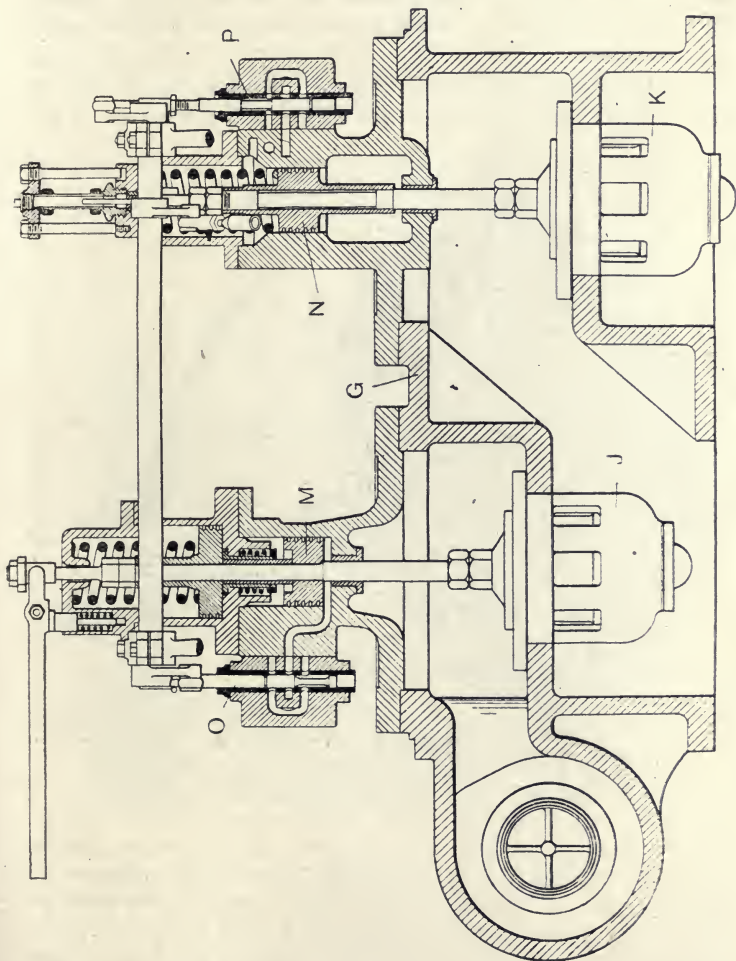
WESTINGHOUSE STEAM TURBINE. GOVERNING MECHANISM.
